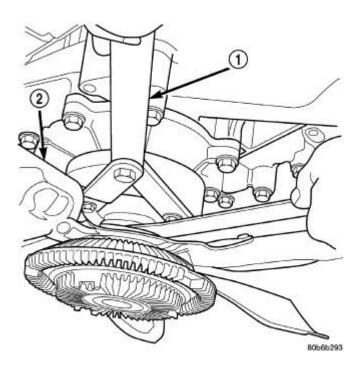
Using Special Tool 6958 Spanner Wrench & Adapter Pins 8346 Courtesy of CHRYSLER LLC
